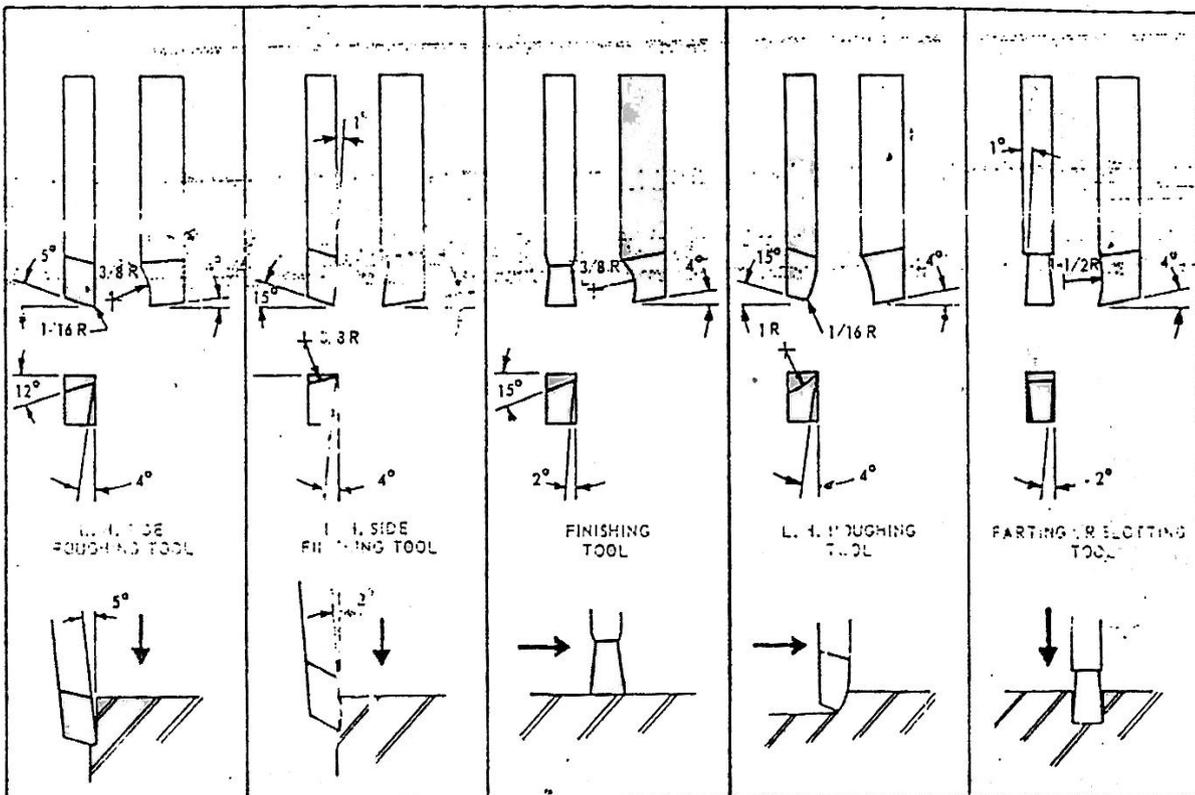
Cutting tool shapes recommended for mild steel.
